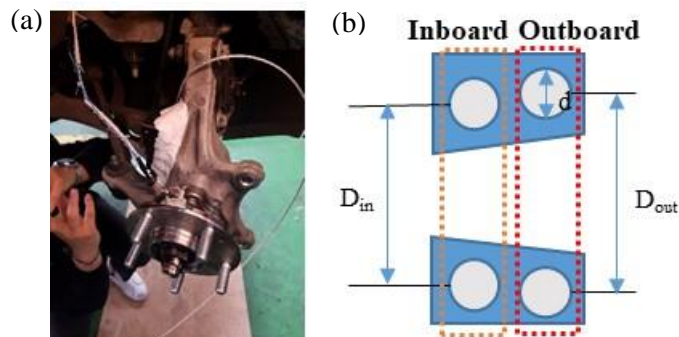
(a) Accelerometer setup, (b) simplified cross-section of wheel bearing
